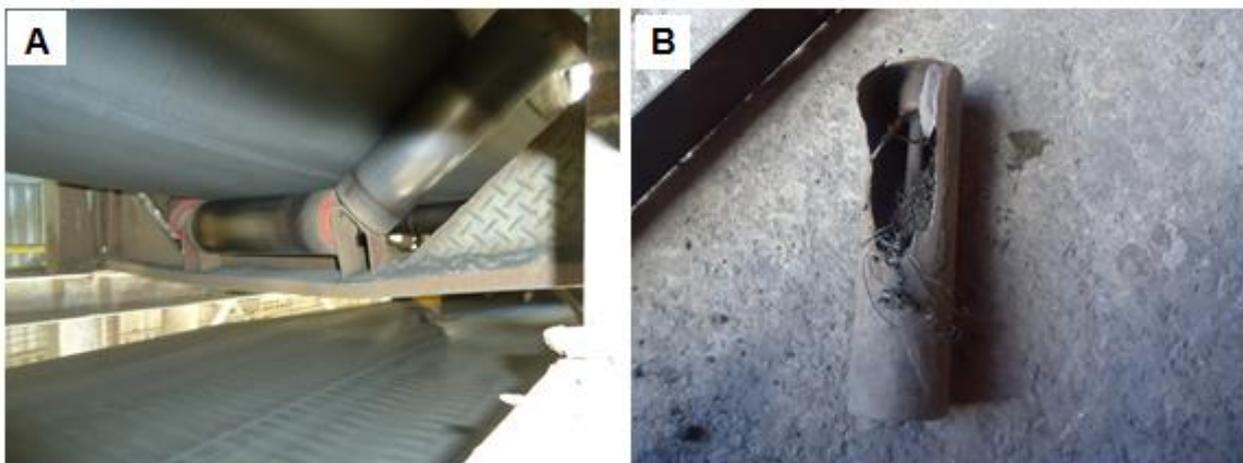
(A) Conveyor physical structure and belt support (B) Belt Conveyor Roller Damaged.
